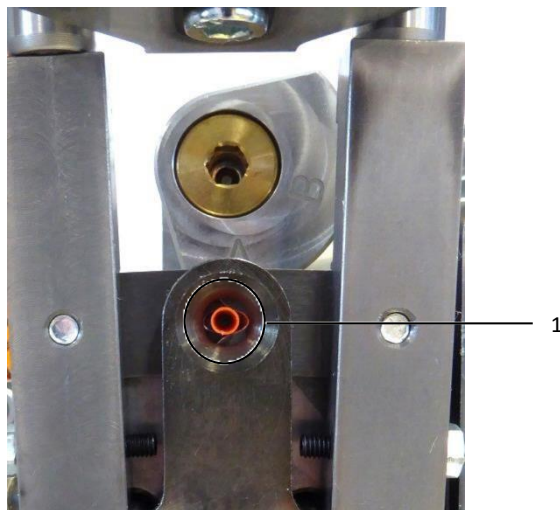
Sleeve and stranded wire fixing unit are aligned
